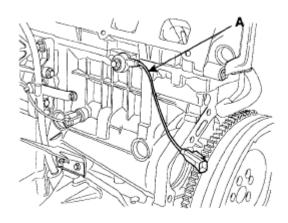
Identifying Oil Pressure Sensor Courtesy of HYUNDAI MOTOR CO.
